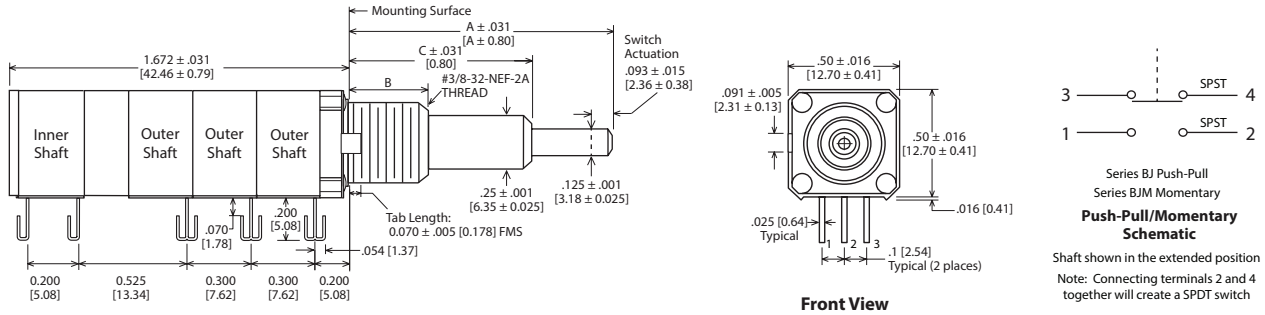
SHA-22: Concentric Shafts, B22, 3 Potentiometer(s) or RS + MP, 3/8" Bushing
